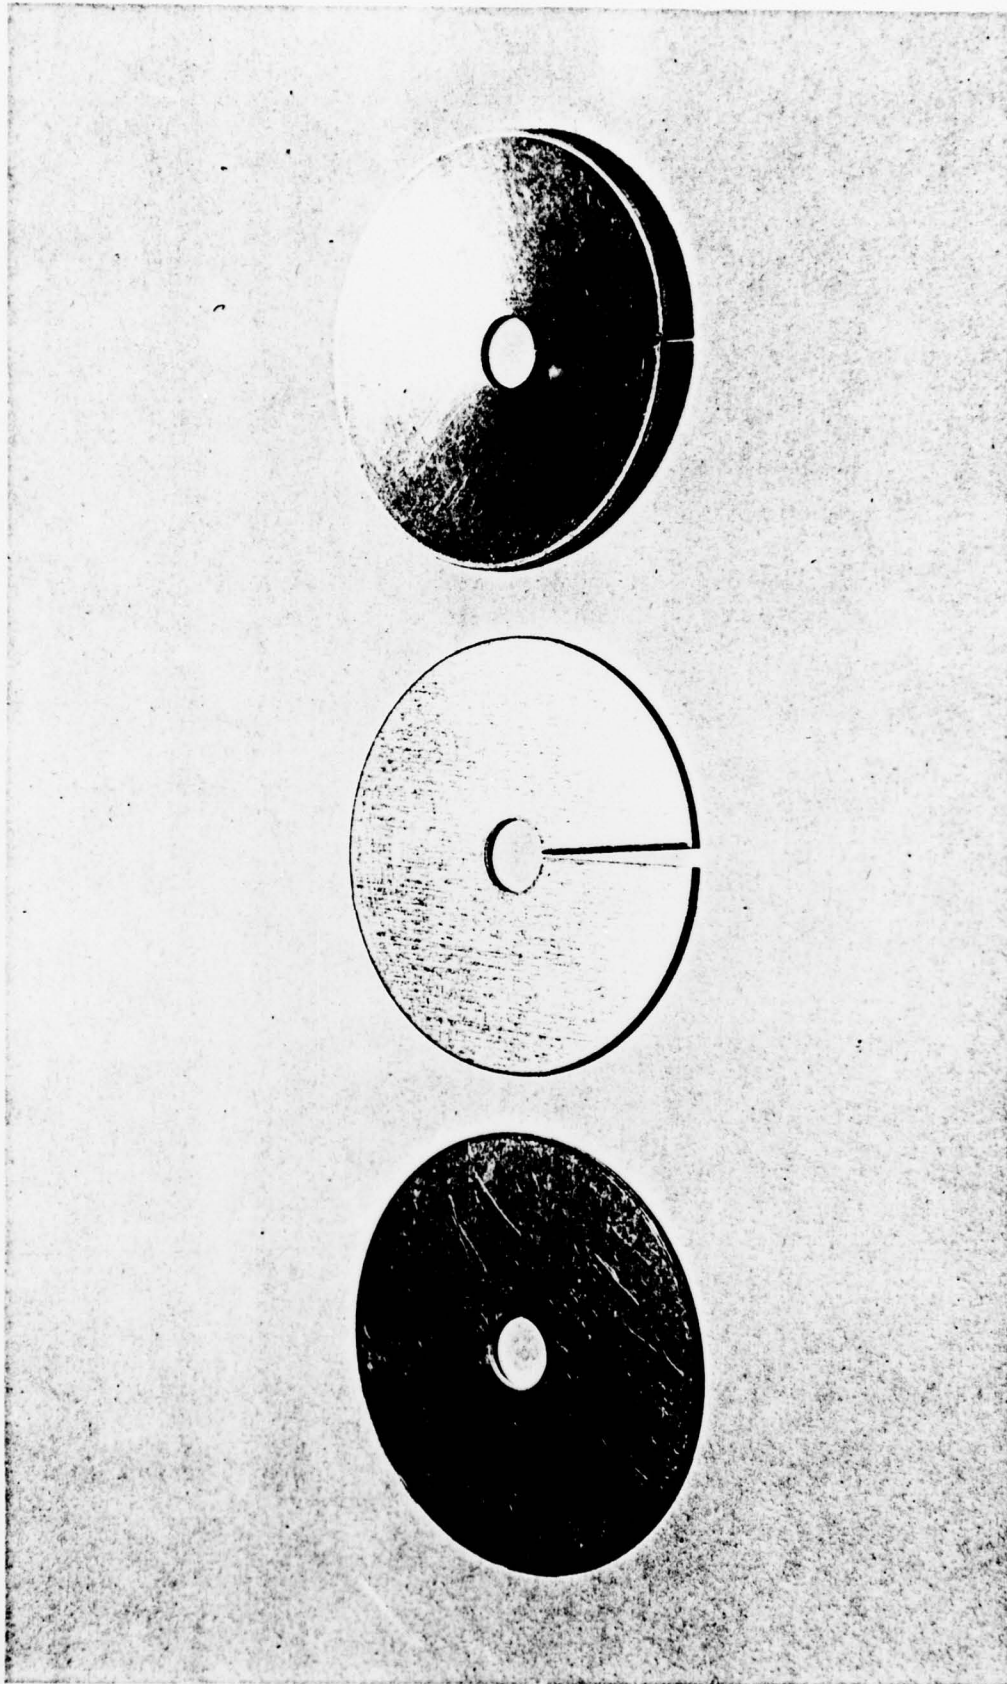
Successive stages in the manufacture of a self-stressed fracture mechanics test-piece from 16 gauge (0.064" thick) aluminium sheet.
